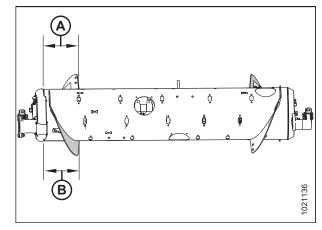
Wide Configuration – Rear View A - 257 mm (10 1/8 in.) B - 257 mm (10 1/8 in.)
